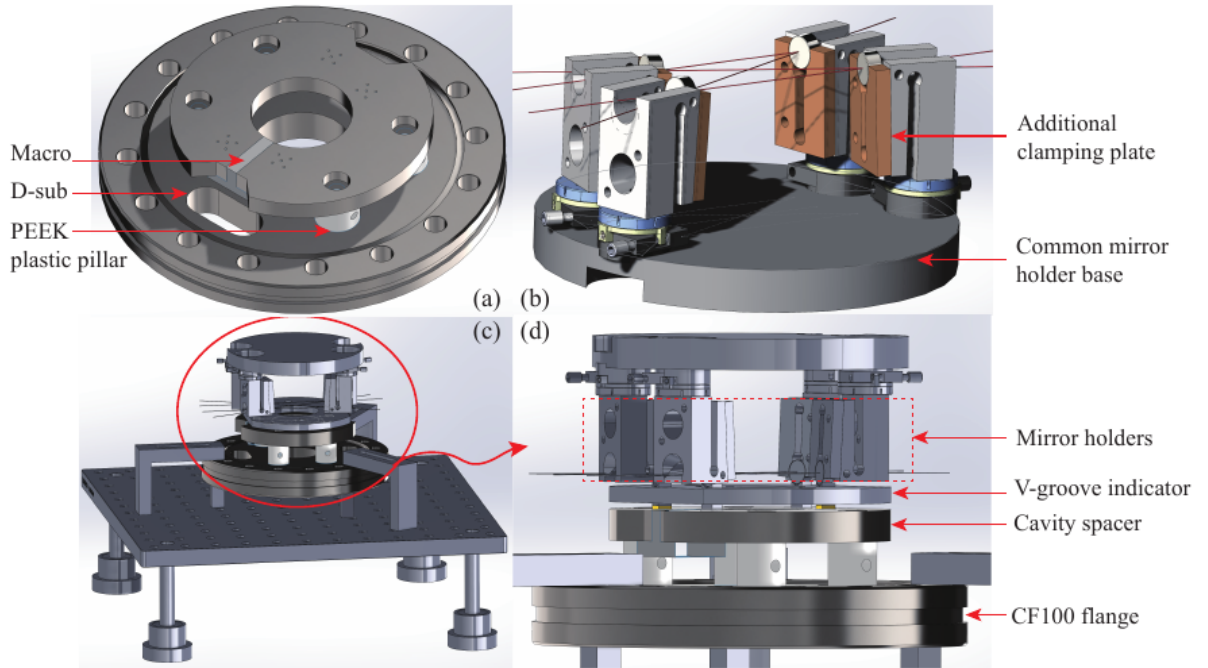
New cavity design and the improved cavity alignment tools. (a) Optical ring cavity spacer to be assembled into the vacuum chamber. (b) Improved cavity alignment tools, an additional clamping plate is added into the original cavity mirror holder (see Fig. 4.4) to facilitate the mirror holding, a common baseplate with fixed positions corresponding to the four mirror holders helps align the cavity in the initial stage. (c) Schematic for gluing the cavity mirrors with the new tools, details in the red circle is expanded in (d). (d) Cavity mirror gluing with the new tools, a circular baseplate with four rectangular holes corresponding to the positions of four V-grooves is used as an indicator for V-grooves.
